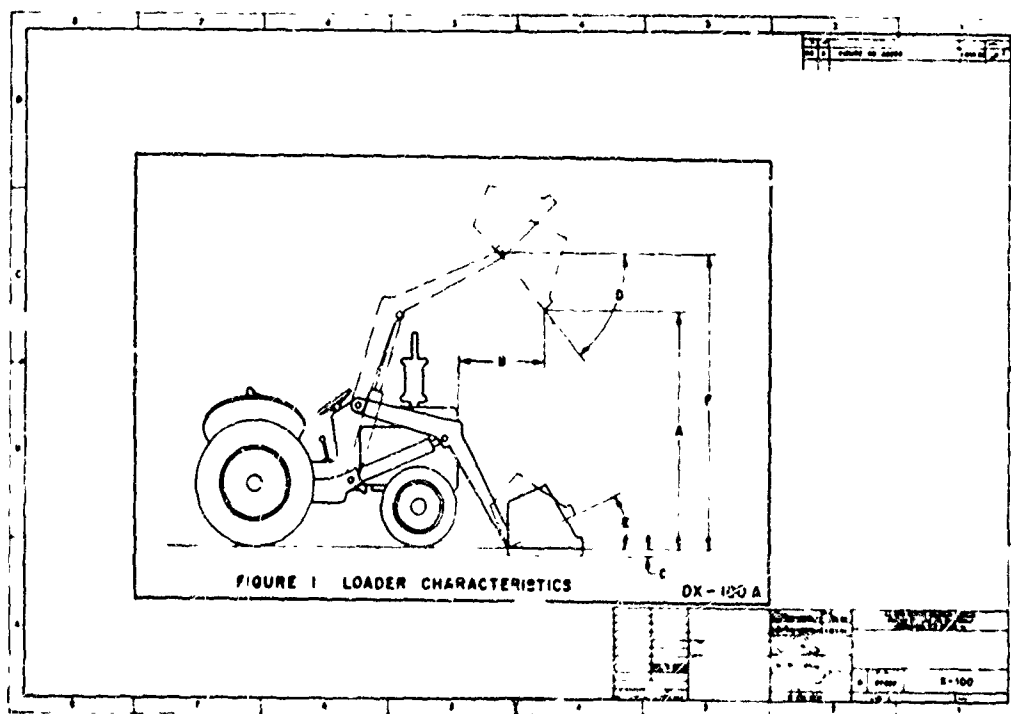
Monodetail Drawing and Specification Figure Drawing
